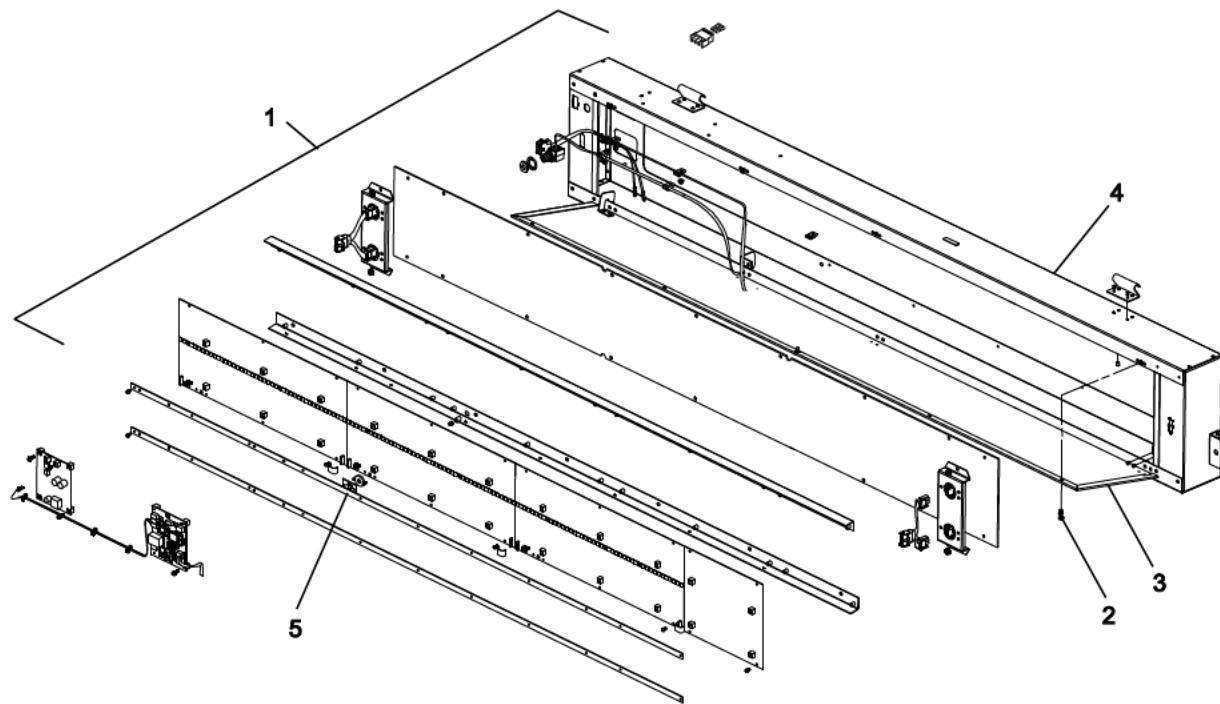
Replace Front Destination Sign Light Sensor PCB
